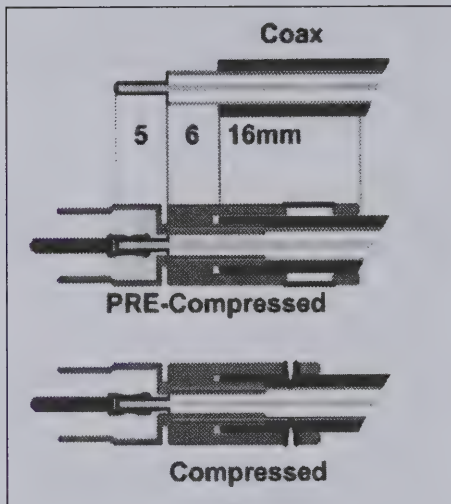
Cable preparation detail and assembly for compression BNC connectors.
